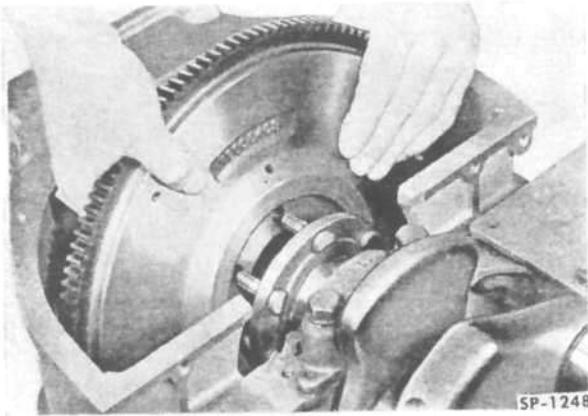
INSTALLING FLYWHEEL ON CRANKSHAFT
